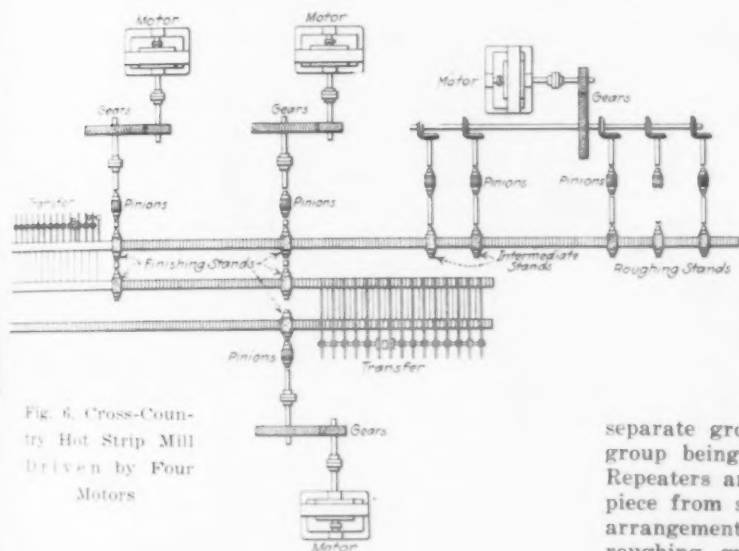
Cross-Country Hot Strip Mill Driven by Four Motors
